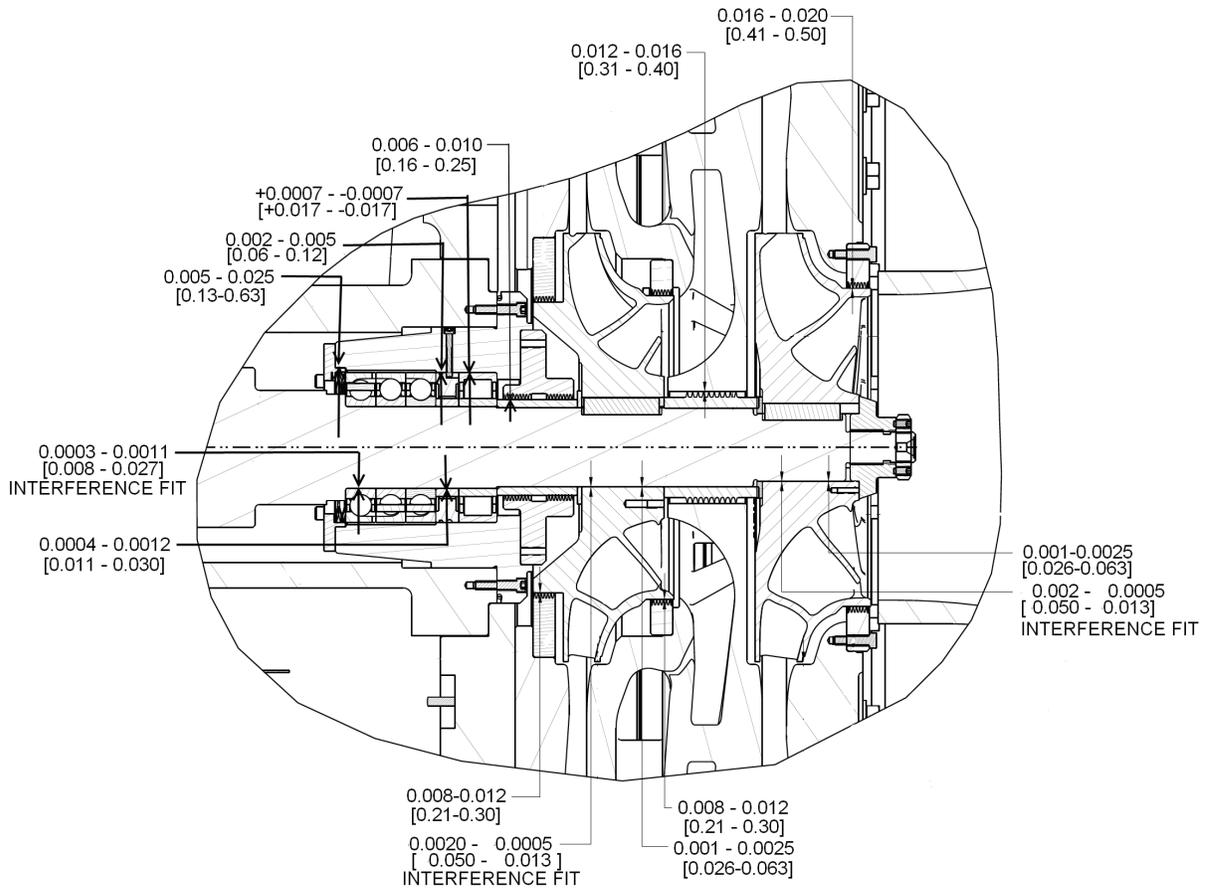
Compressor Fits and Clearances — Two-Stage Compressors
